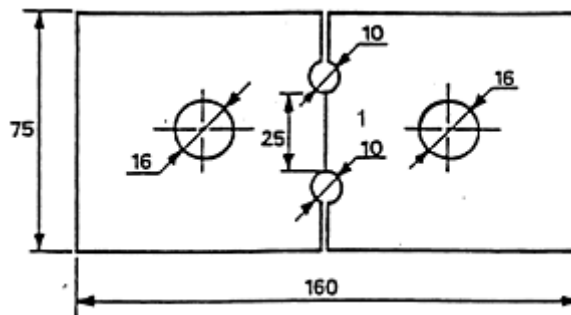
Notched tensile specimen geometry and dimensions [45]
